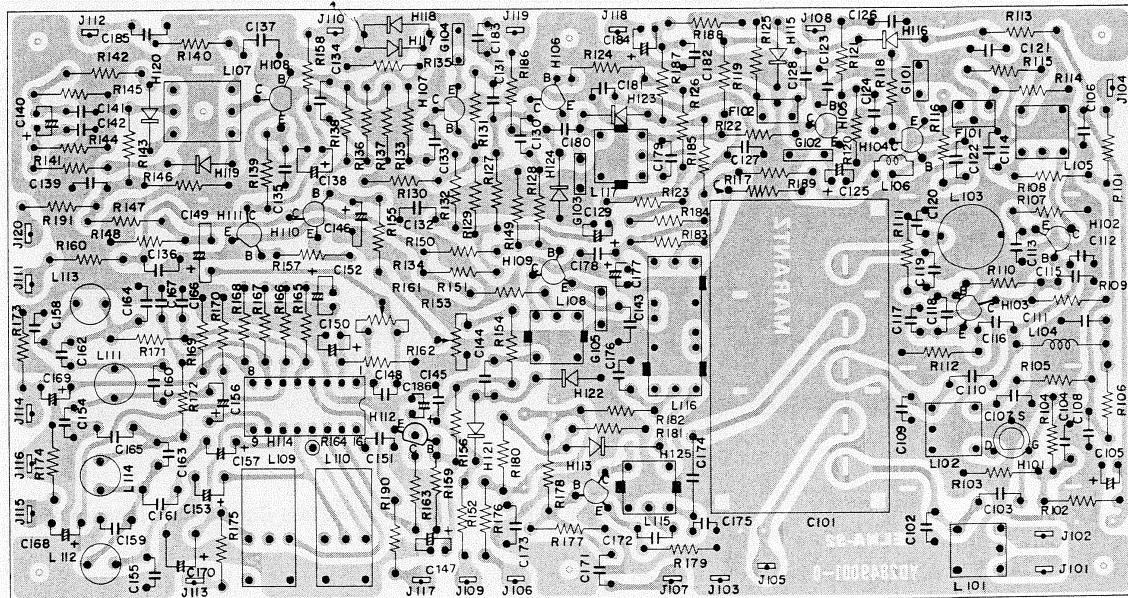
FM/AM Tuner Assembly P100 Component Locations
